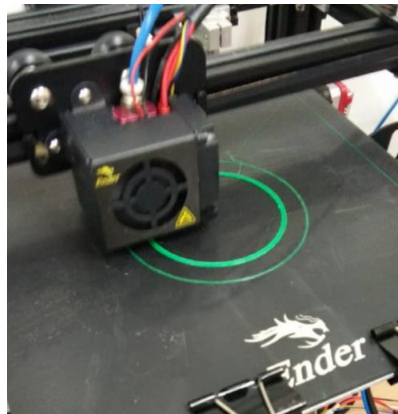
3D printing progress of the Sensor Placement Mechanism.
